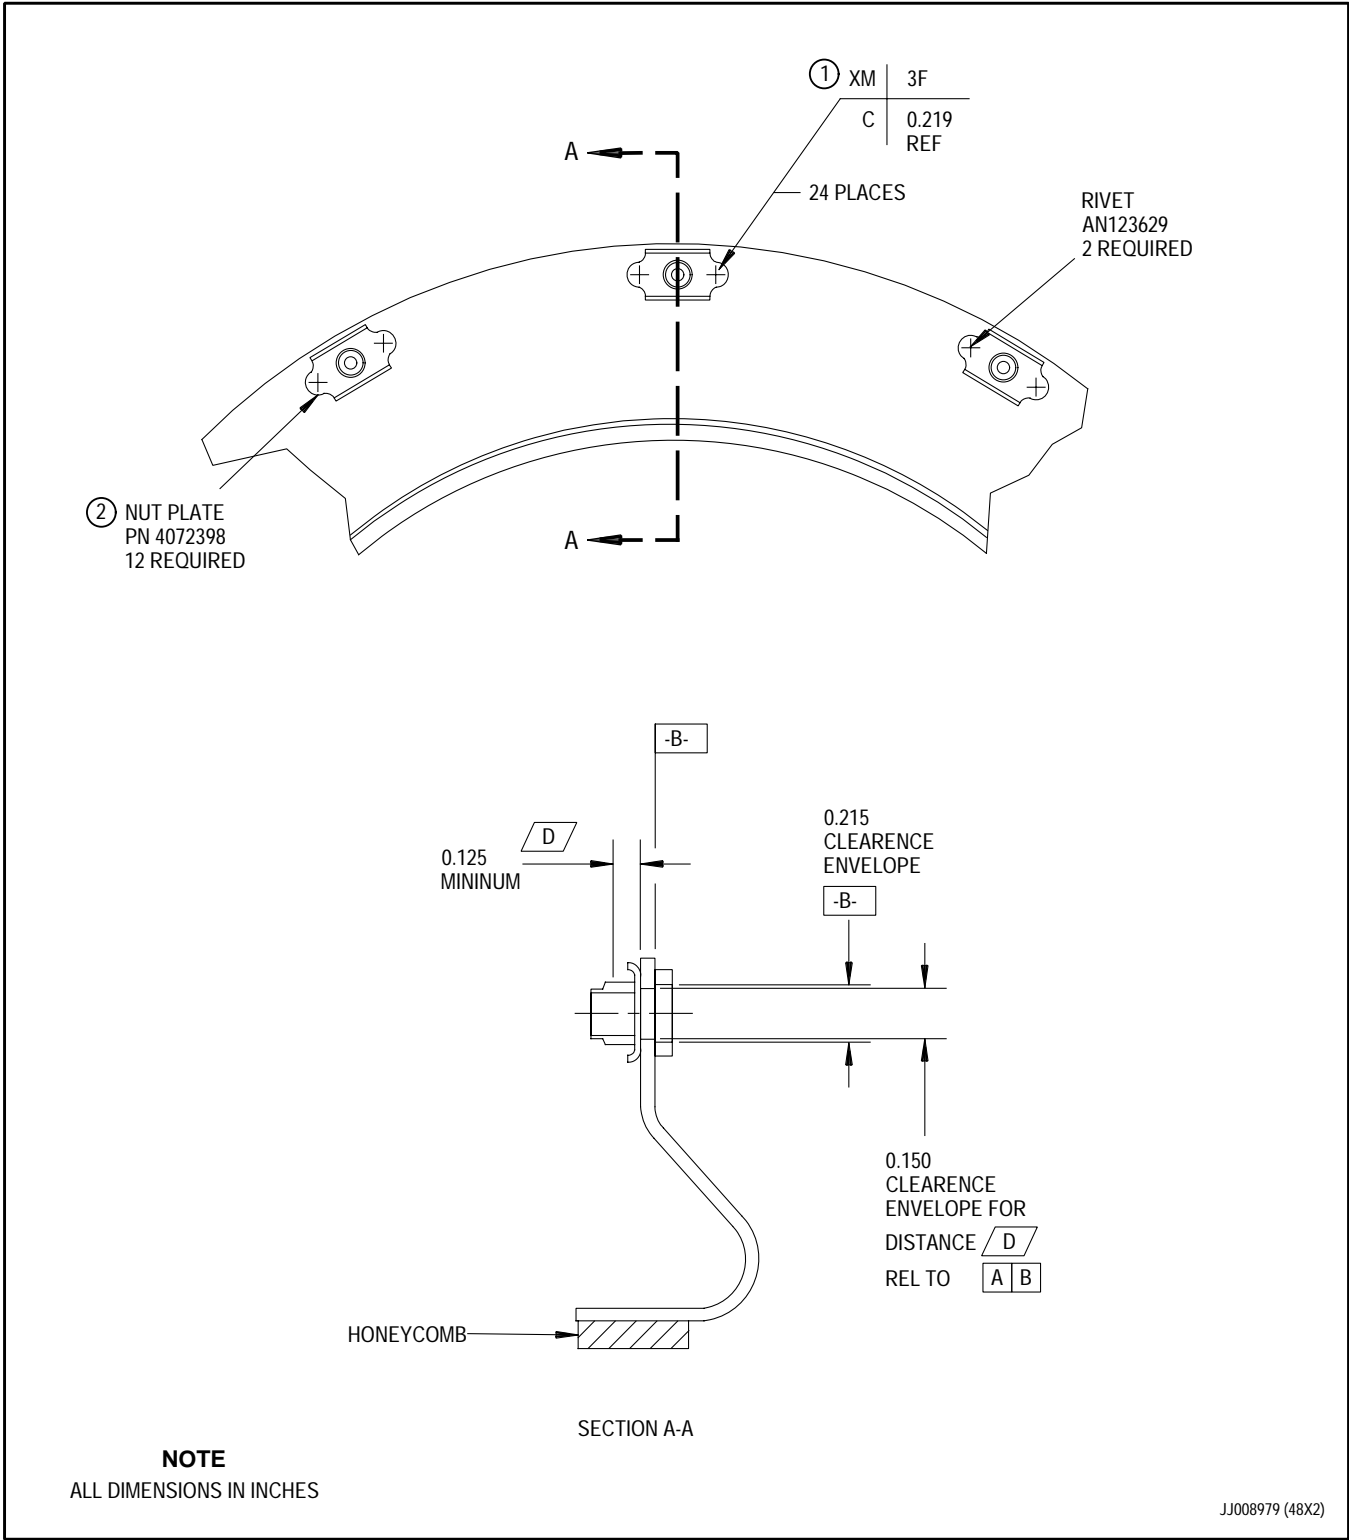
Fourth Stage Turbine Air Sealing Ring Assembly with Honeycomb - Nut Plate Replacement
